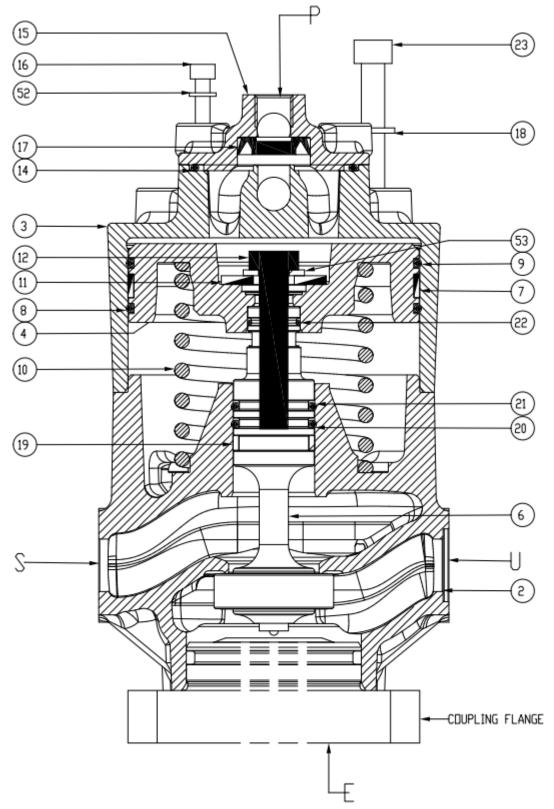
Spool assembly CO 3 way pneumatic valve size 1" 1/2: stainless steel machining
